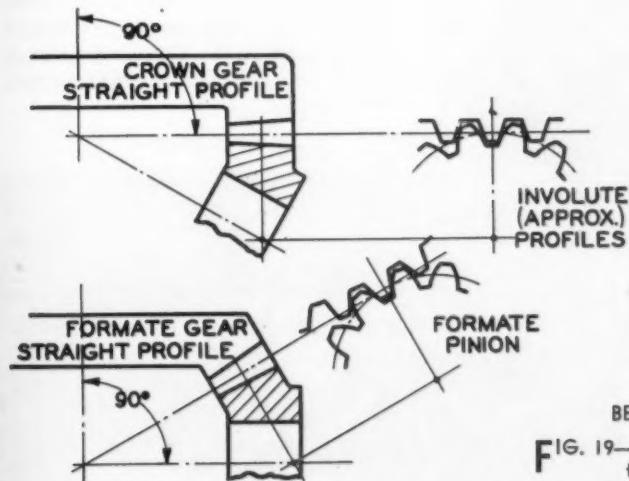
Usual generation is shown in upper view; Formate gears in lower.
